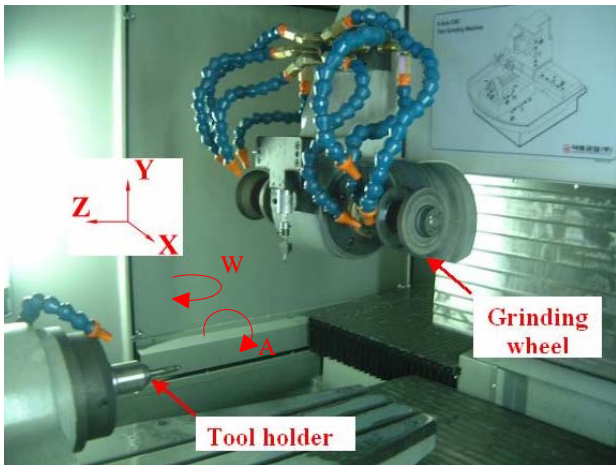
5-axis CNC machine for manufacturing of ball end mill
